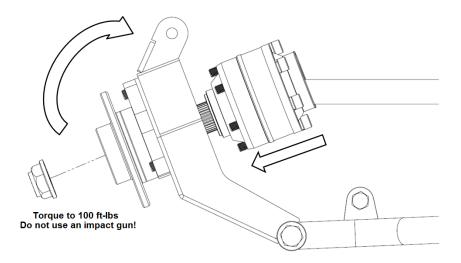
Tilt the shaft downwards, and rotate the upright upwards to slide the spline through the bearing.
